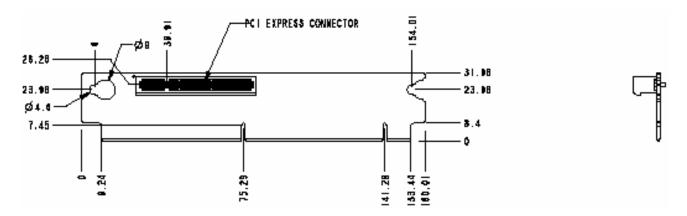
1U Full-Height PCI-Express Riser Card Mechanical Drawing
